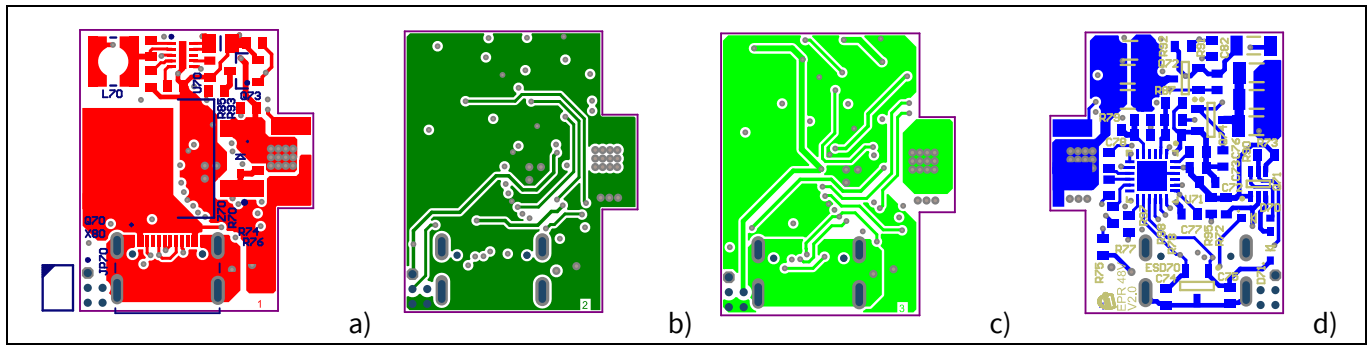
EPR board PCB: a) top side, b) inner top, c) inner bottom, d) bottom side
